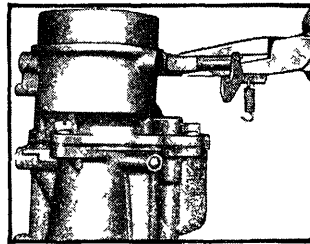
Install choke lever and shaft. Check for loose lever on shaft
